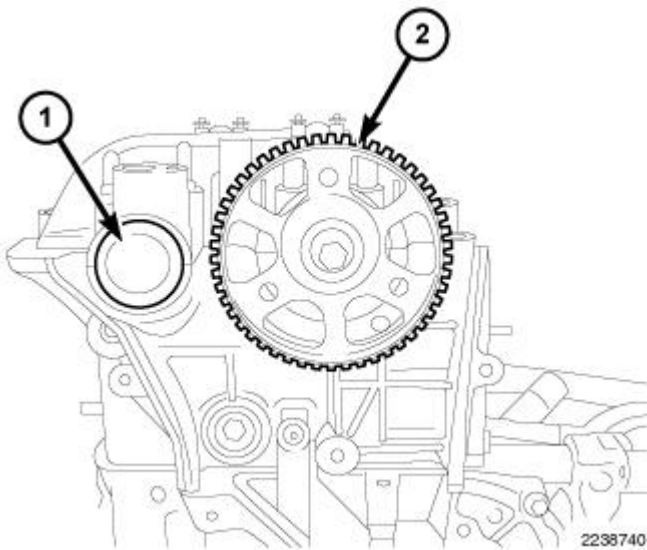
Exhaust Camshaft Oil Seal & Camshaft Sprocket
